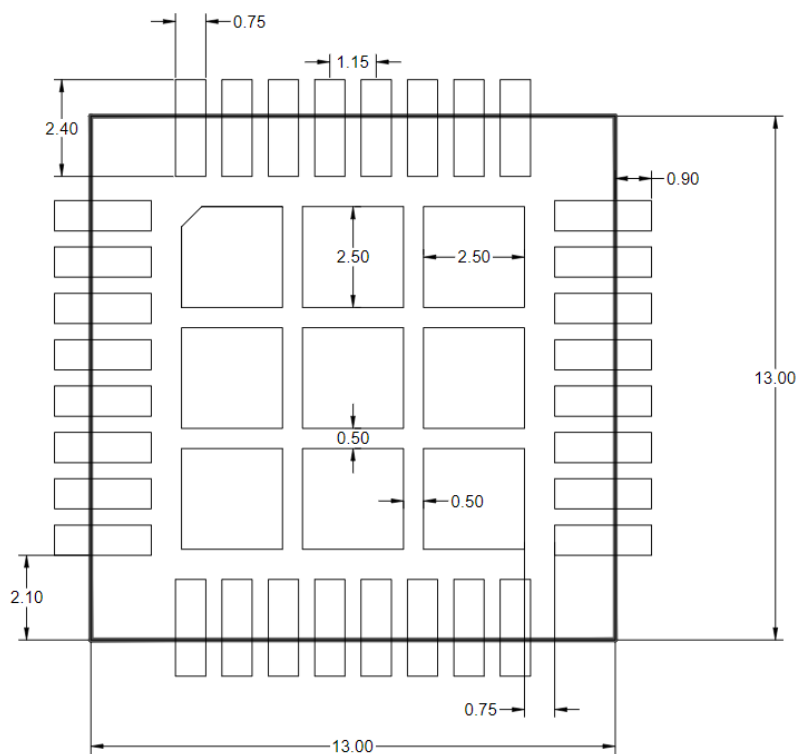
RECOMMENDED PCB FOOTPRINT.
